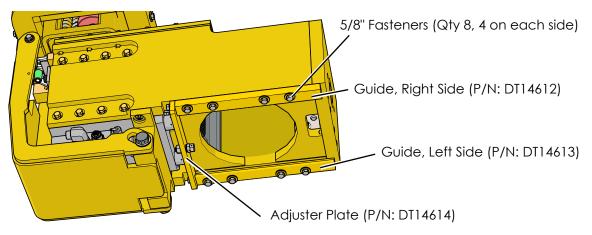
Back-Up Wrench with old design for Adjuster Plate and Guides
